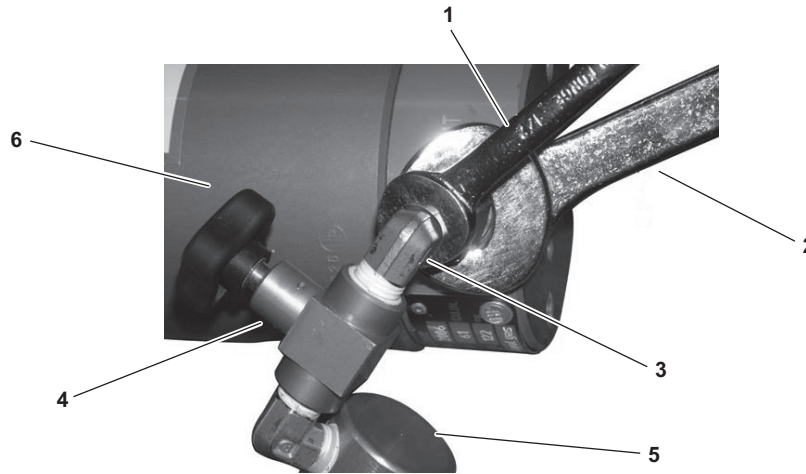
Using Wrenches to Remove P1 Bleed Valve and CO/H₂O Indicator Housing
